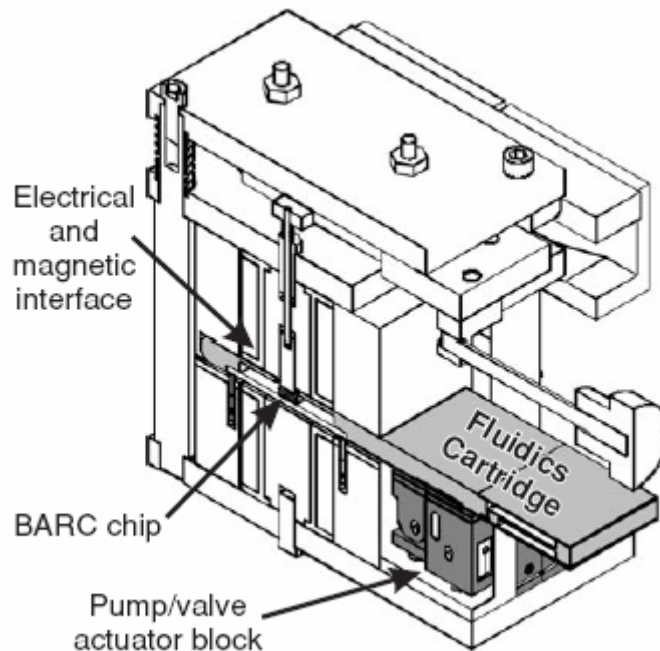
Schematic cross-sectional view of the complete mechanical assembly of hybrid fluidic system[6].
